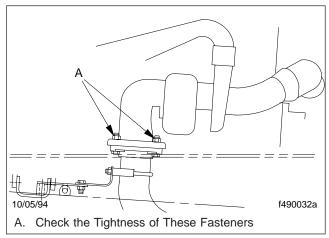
, Typical Exhaust-Pipe to Exhaust-Flange Fasteners, OM 366 Engine Shown
